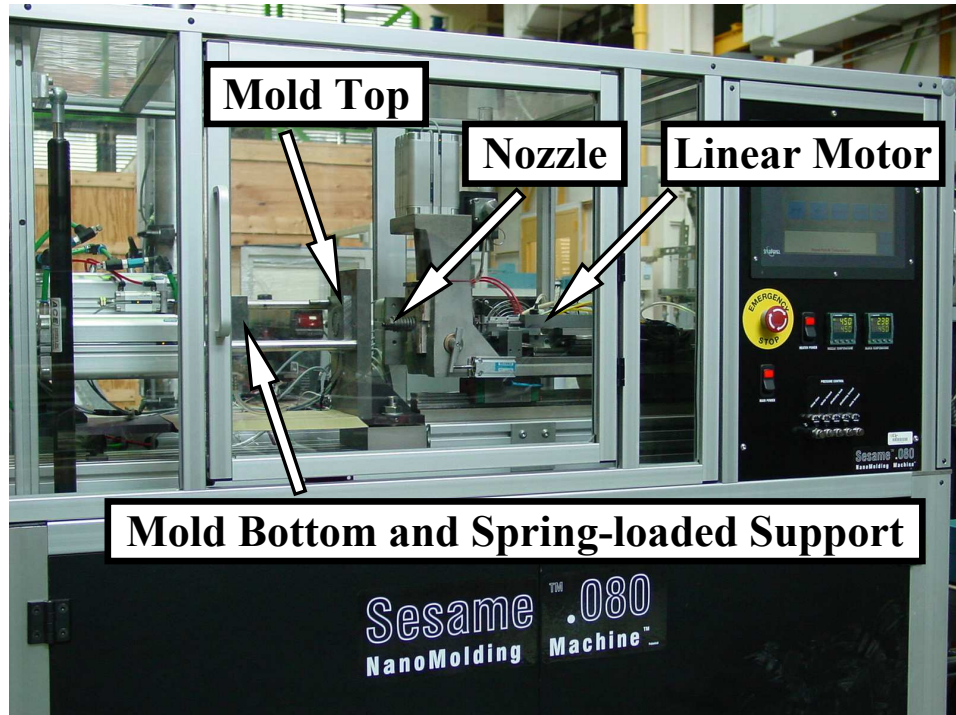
Front view of the Nanomolding machine– dimensions are roughly $2 \times 1 \times 1$ meters.
